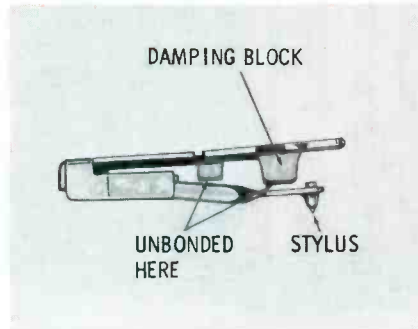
Enlargement of 1-mil stylus assembly shows unbonding at damping block.
